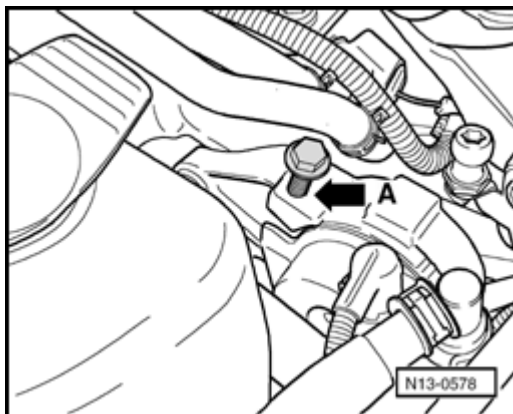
Identifying Bolt M8X50 In Hole Of Ribbed Belt Tensioner Roller
